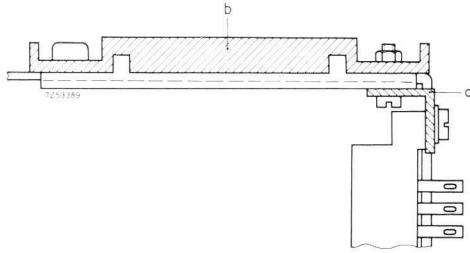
Chassis 4322 026 38230 detail, (a) connector rail, (b) profile strip
